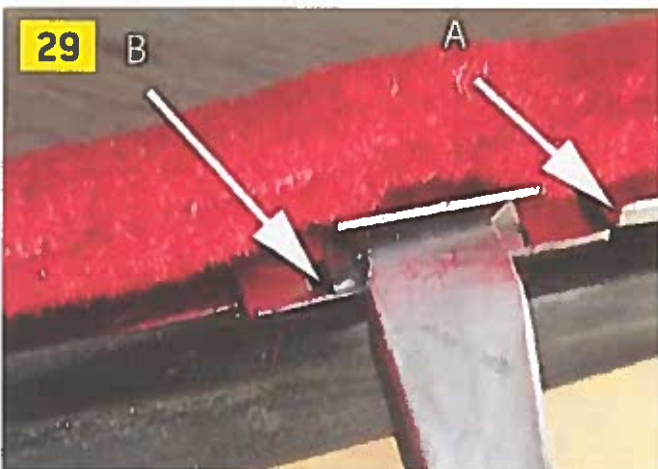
One side of the aluminum core has a right angle bent into the edge (A). Firmly press the clip into the channel with the bent flange so that it can lock in the Aluminum core as shown (B). Lever the clip using the screwdriver and you will hear it snap into place.
